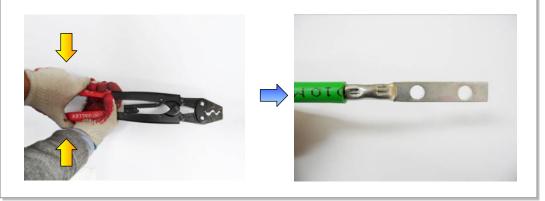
Fixing Pressure Terminal_Handheld Compressor (2)
